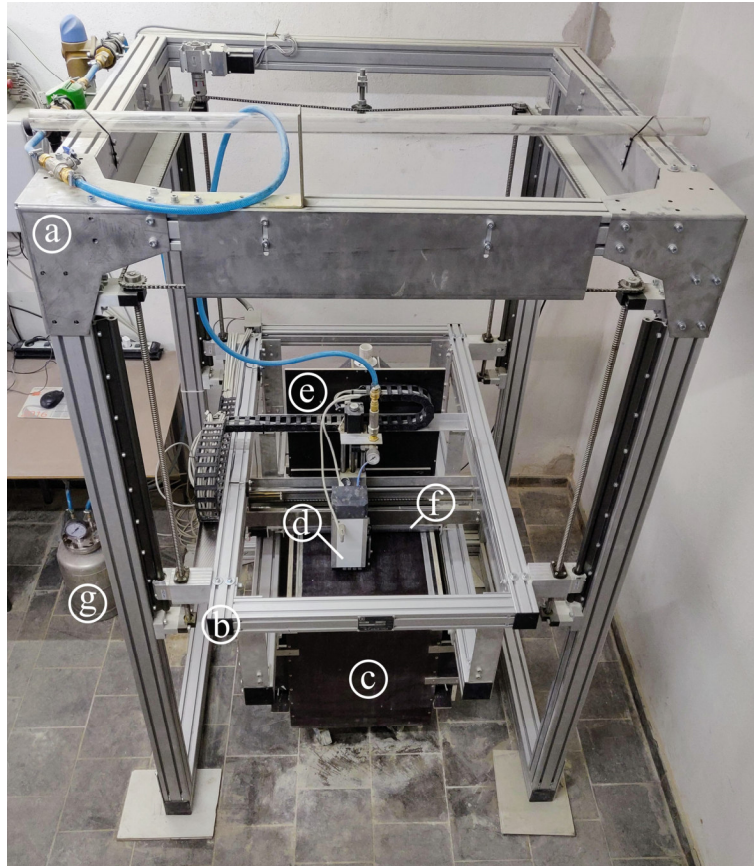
Prototype printer for selective cement activation (a: printer frame, b: CNC portal, c: build chamber, d: print head, e: bulk material dispenser, f: compaction roller, g: pressurized fluid supply)
